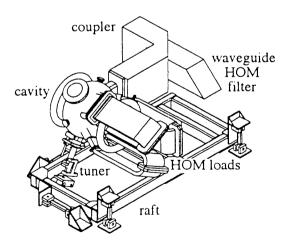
The layout of the PEP-II cavity assembly. 18
